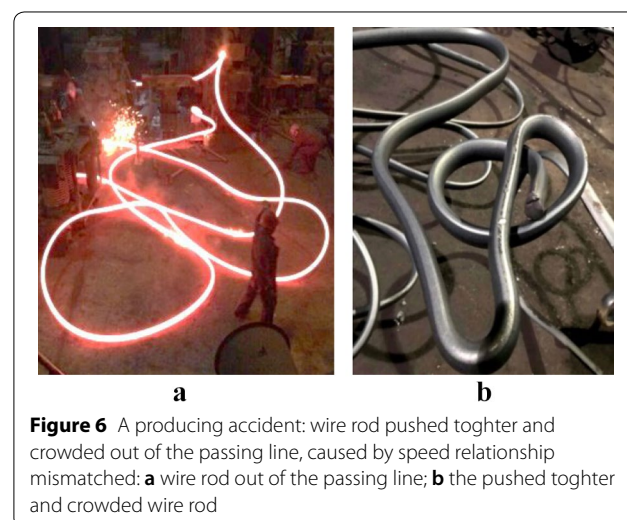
A producing accident: wire rod pushed toghter and crowded out of the passing line, caused by speed relationship mismatched: a wire rod out of the passing line; b the pushed toghter and crowded wire rod
